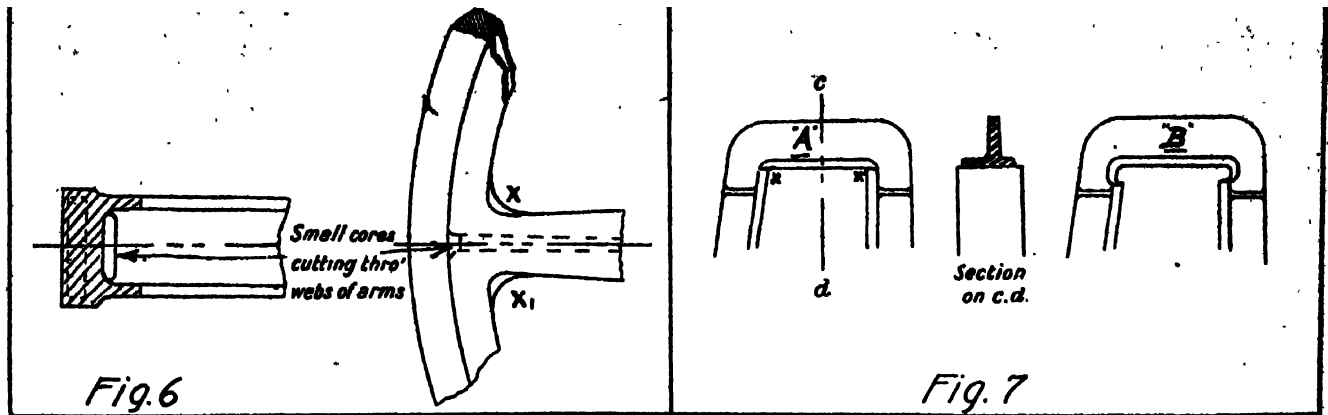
SUGGESTED METHOD FOR OVERCOMING BREAKAGE BETWEEN WHEEL AND SPOKES, THROUGH USE OF SMALL CUTTING CORES OR LARGER FILLETS FIG. 7—REDESIGN OF LOCOMOTIVE AXLE-BOX GUIDES
